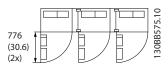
Front Clearance of IP21/IP54 Enclosure Type, Frame Size F11
